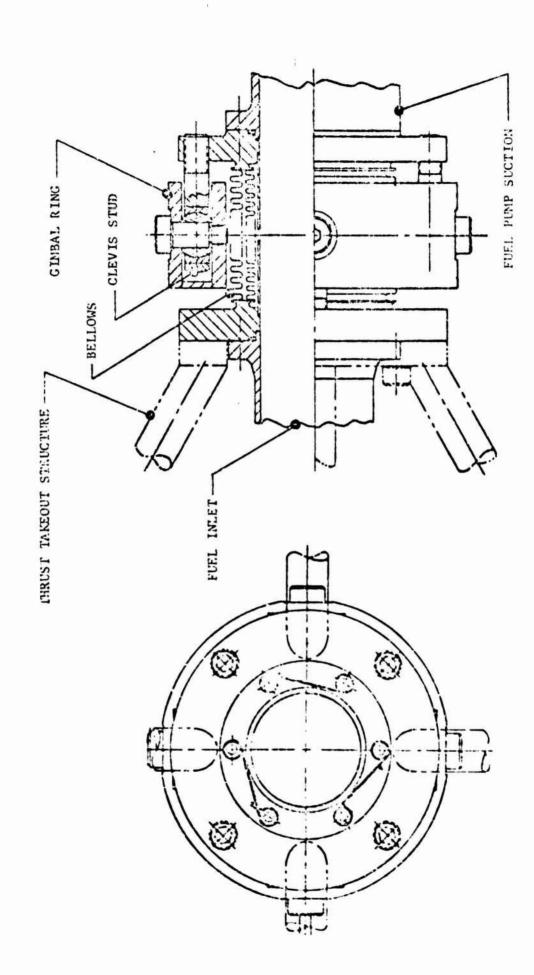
C2. 10K Engine In-Line Fuel Pump (4 of 4)
